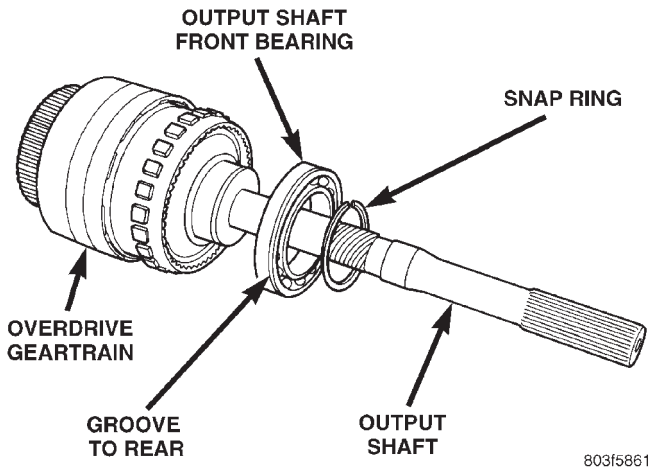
Output Shaft Front Bearing DISASSEMBLY AND ASSEMBLY
